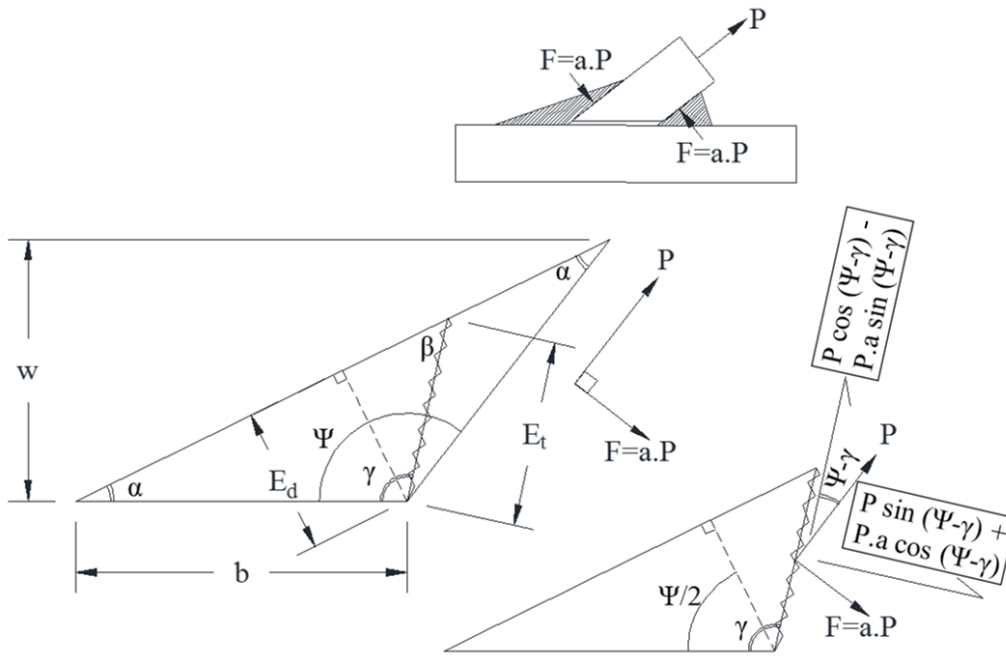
Skewed T-Joint with double fillet welds.
